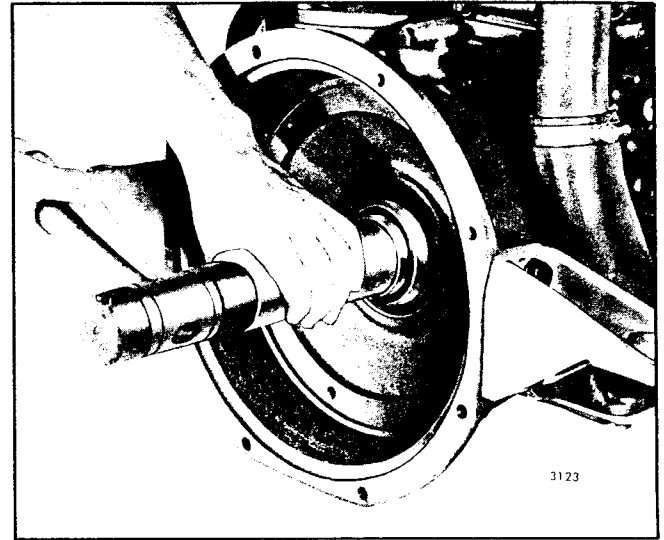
Installing Clutch Drive Shaft Pilot Bearing in Clutch Drive Adaptor
